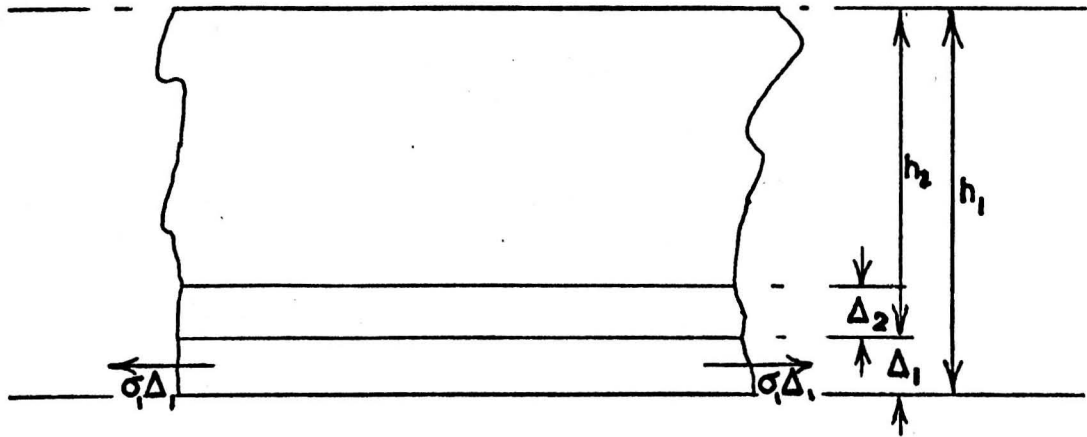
LAYER REMOVAL TECHNIQUE
